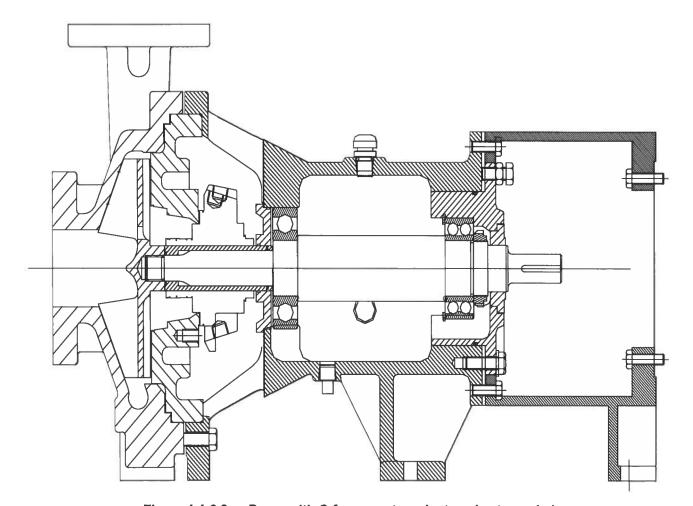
Pump with C-frame motor adapter, short coupled
